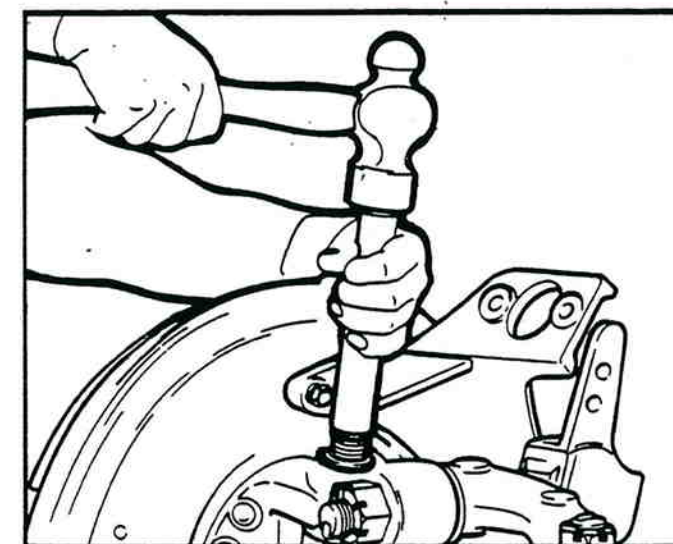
Removal of Tapered Style Knuckle Pin.
